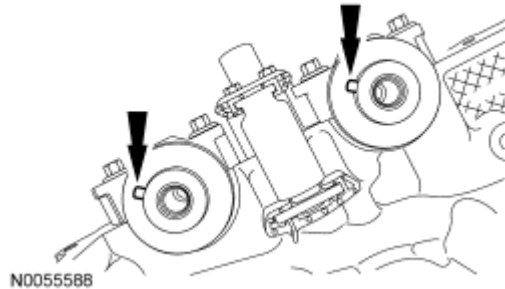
Rotating RH Camshafts Counterclockwise To Neutral Position
